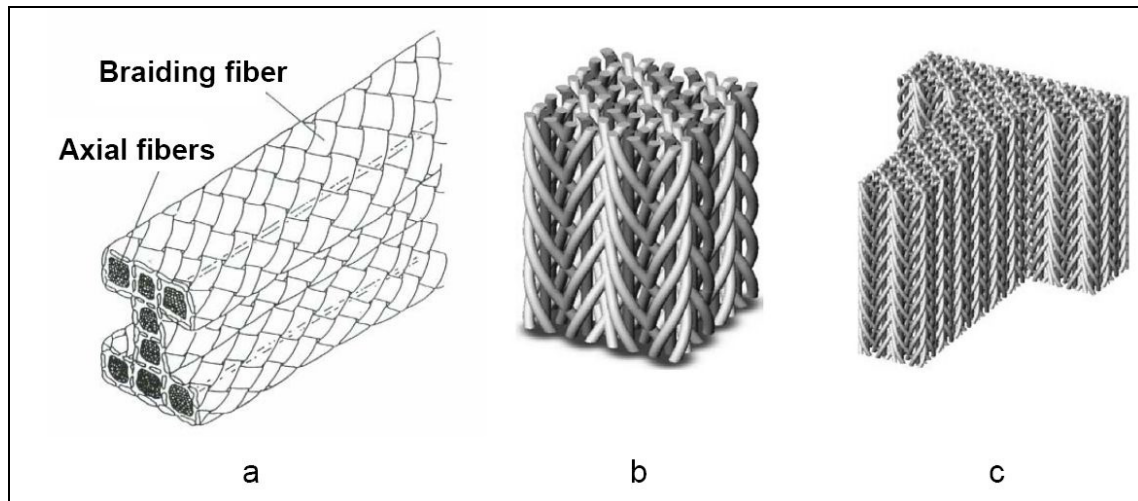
Braided structure a) schematics of I-section, b) braided fiber orientation, c) T-sections
